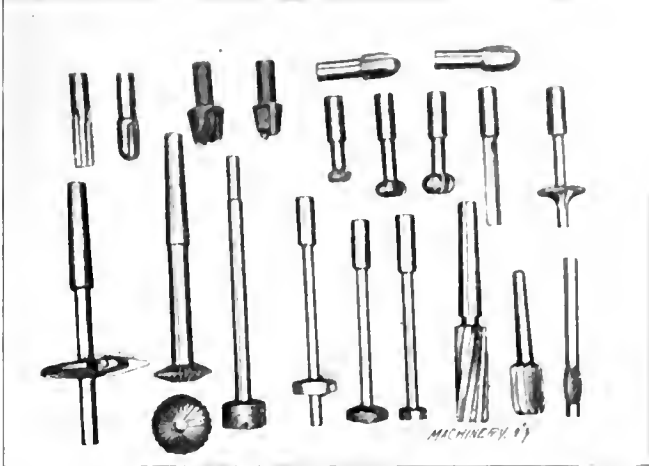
Milling Tools used in Die-sinking, with Examples of Fly Cutters
